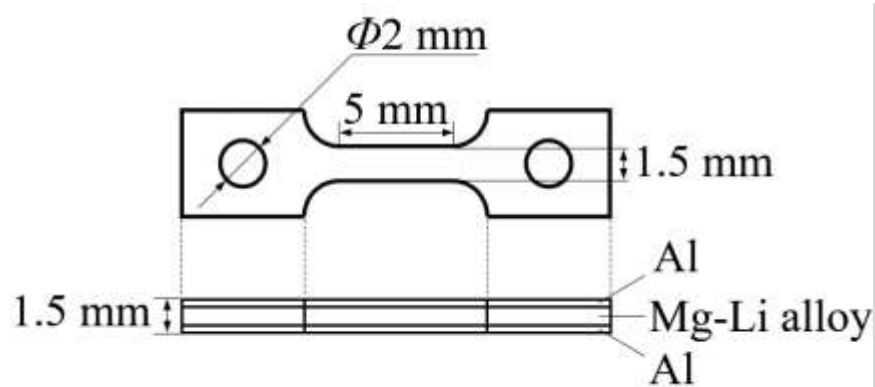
Schematic drawings of the tensile test specimen; (a) top view and (b) longitudinal section.
